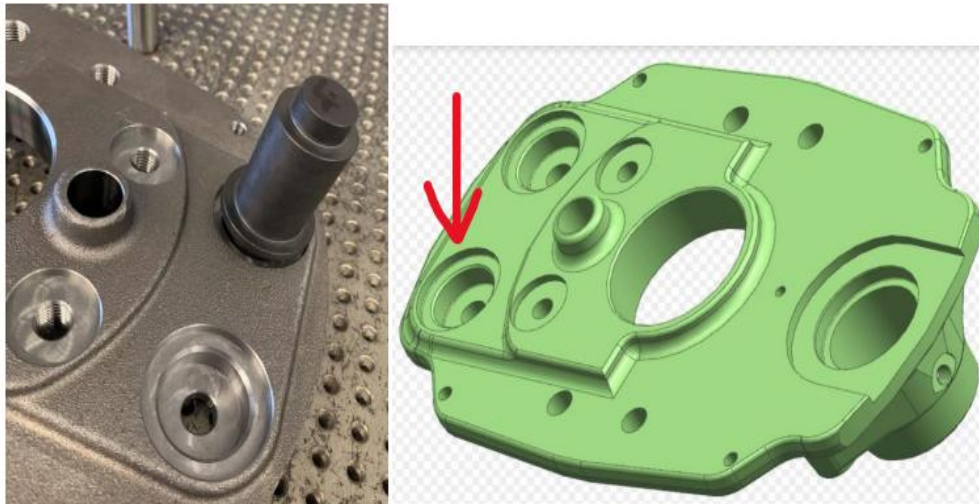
Tapered hole after milling (product error position) (Šimko, 2023)
